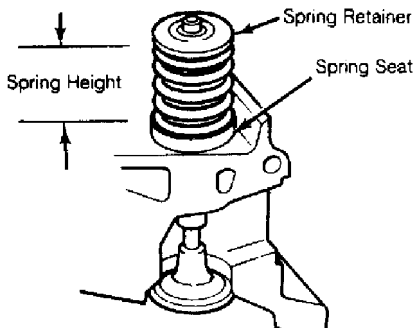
Measuring Valve Spring Installed Height - Typical
